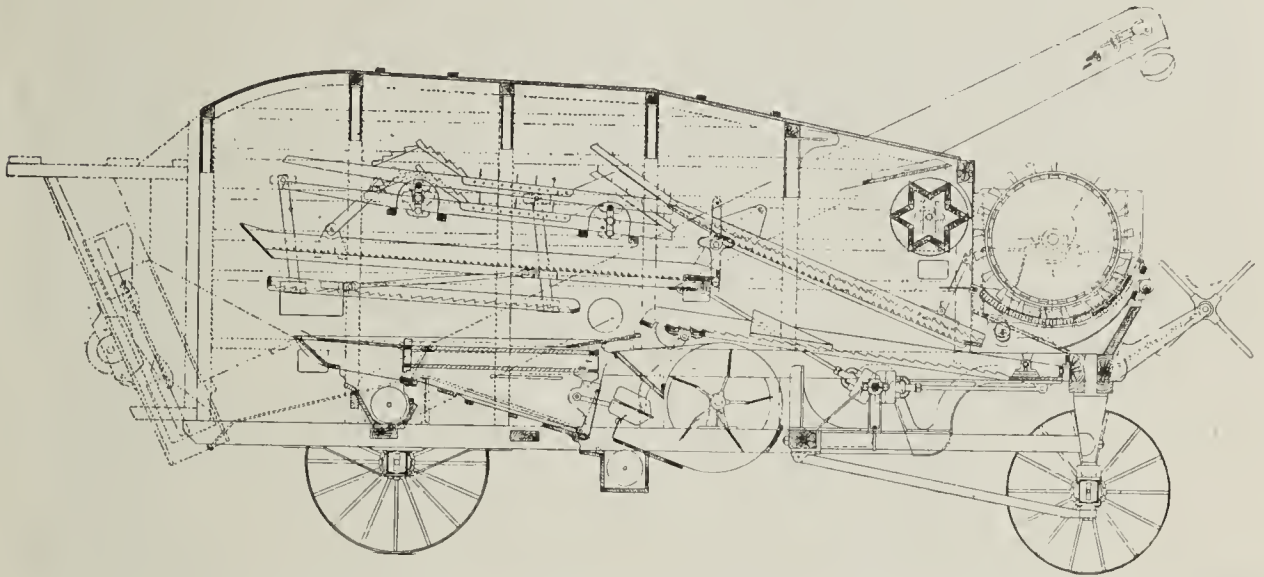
SECTIONAL VIEW OF REEVES SEPARATOR SHOWING BIG CYLINDER AND DOUBLE RACKS.
